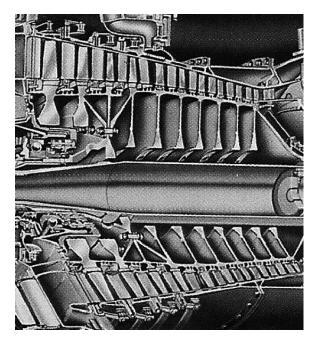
F100-PW-229 core engine compressor inertia welded rotor in titanium and IN718.
